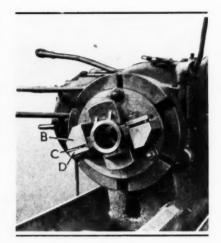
Fixture with Bearing Shown in Fig. 1 Clamped in Position for Boring
